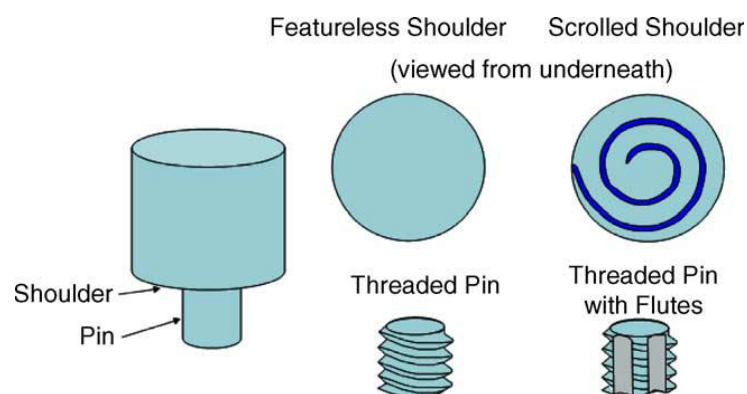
Schematic drawing of the FSW tool (Mishra & Ma, 2005)
